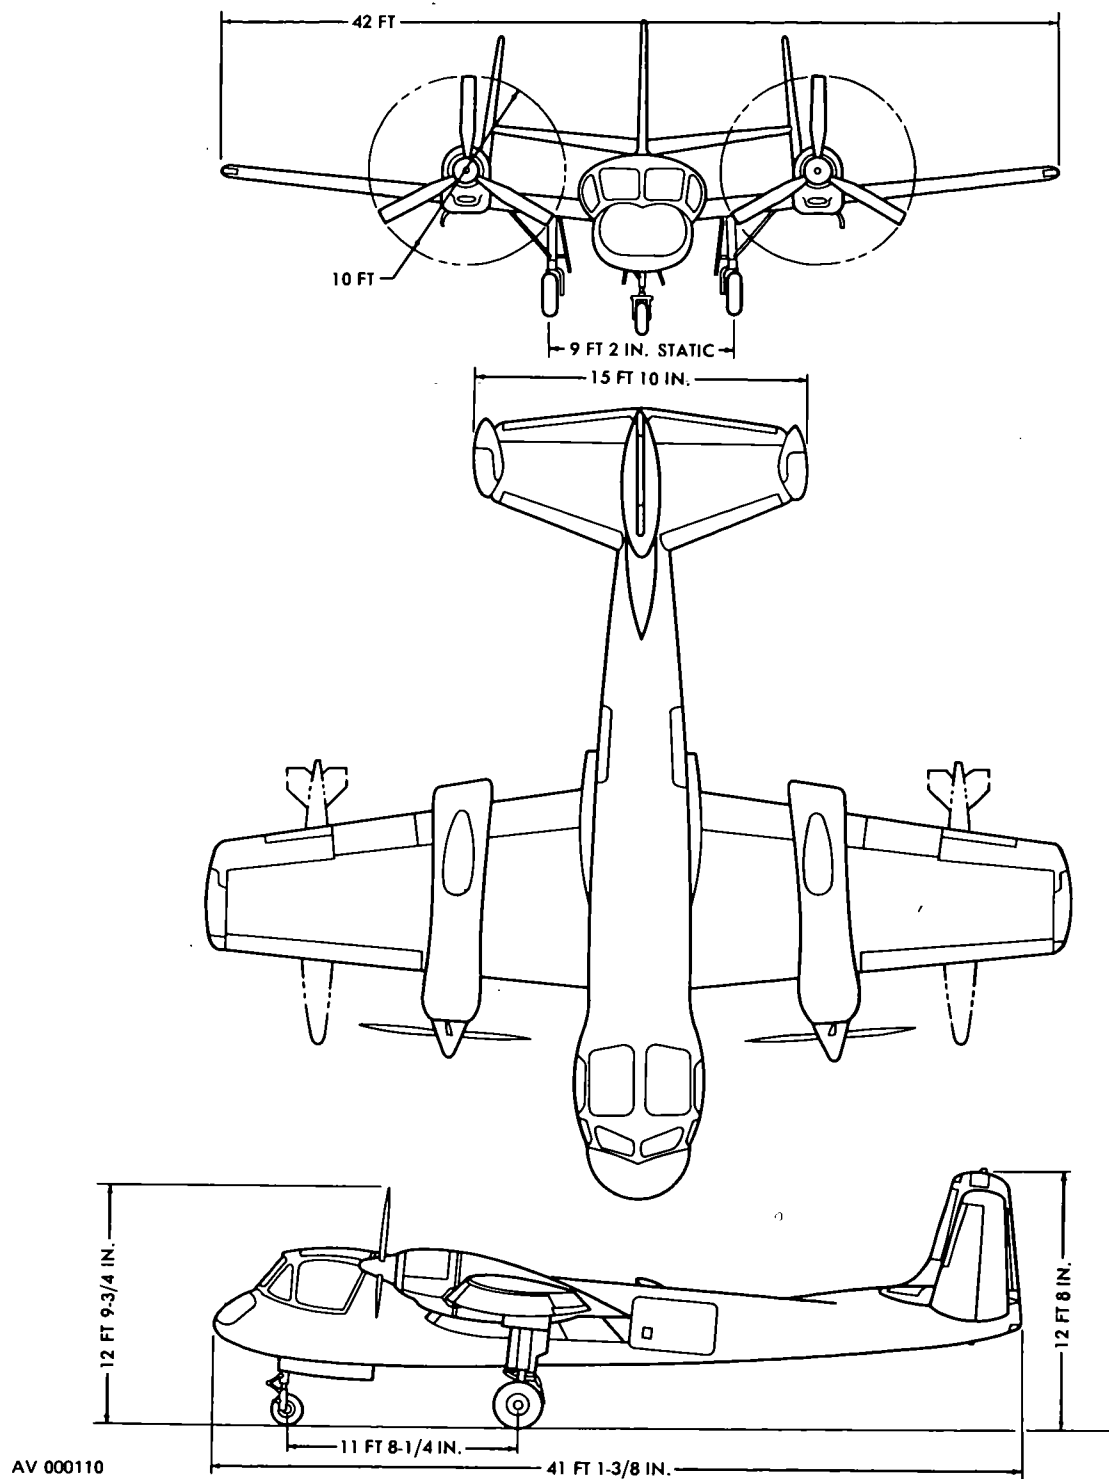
Principal dimensions, OV-1A and C (Mohawk)
